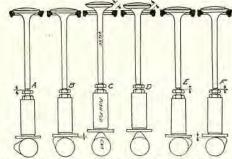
At (A) the correct clearance is shown which permits the valve to seat properly.
